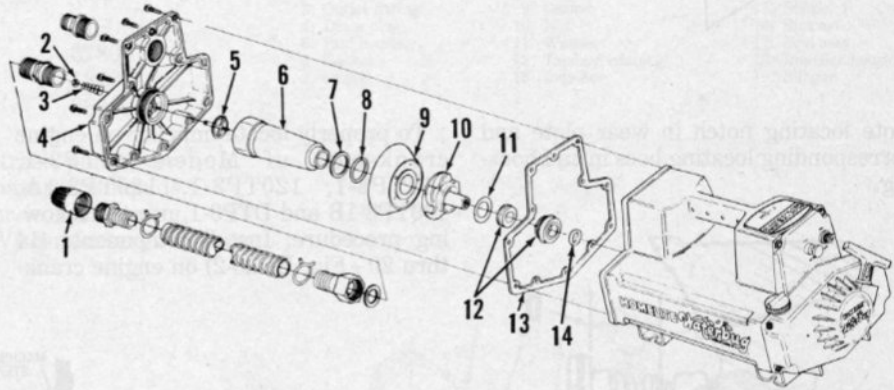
Exploded view of Model P100-1 pump. Collar (11) is used on later models. Later models are equipped with EPDM seals and gaskets and check valve (5) uses an EPDM "O" ring.
